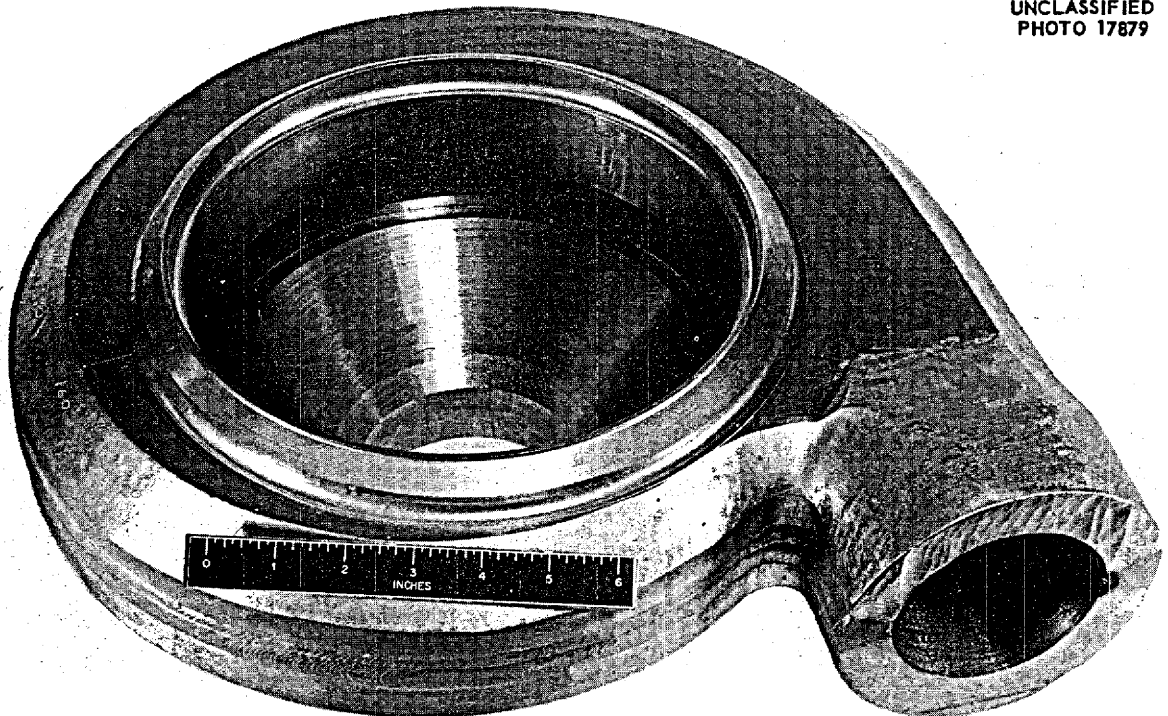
Volute No. 2 After Inert-Arc Welding and Annealing.
